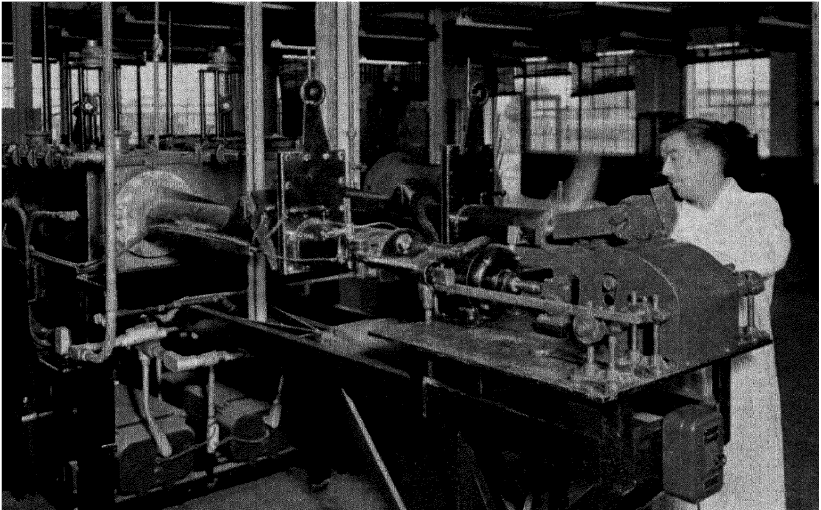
Charging of a graphite boat containing carbide tips into a pusher-type continuous sintering furnace (courtesy of A. C. Wickman, Ltd. and The Hydraulic Press Manufacturing Co.).
